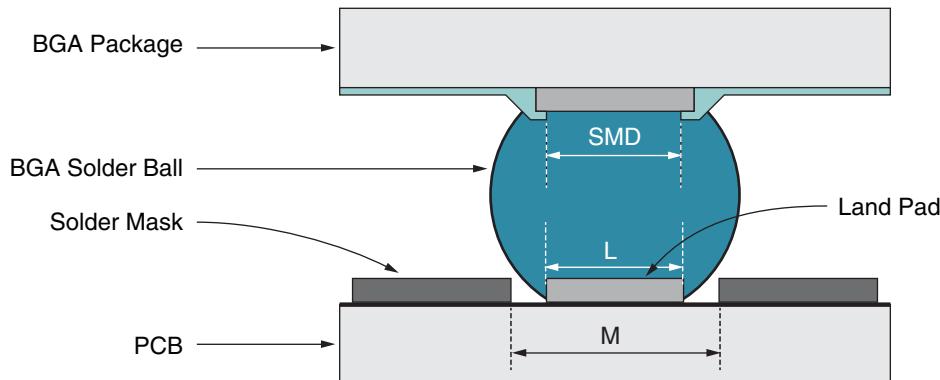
Suggested Board Layout of Soldered Pads for BGA Packages
